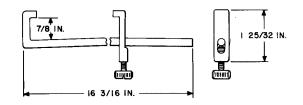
R-2392 Adjustable Soldering Clamping Tool
